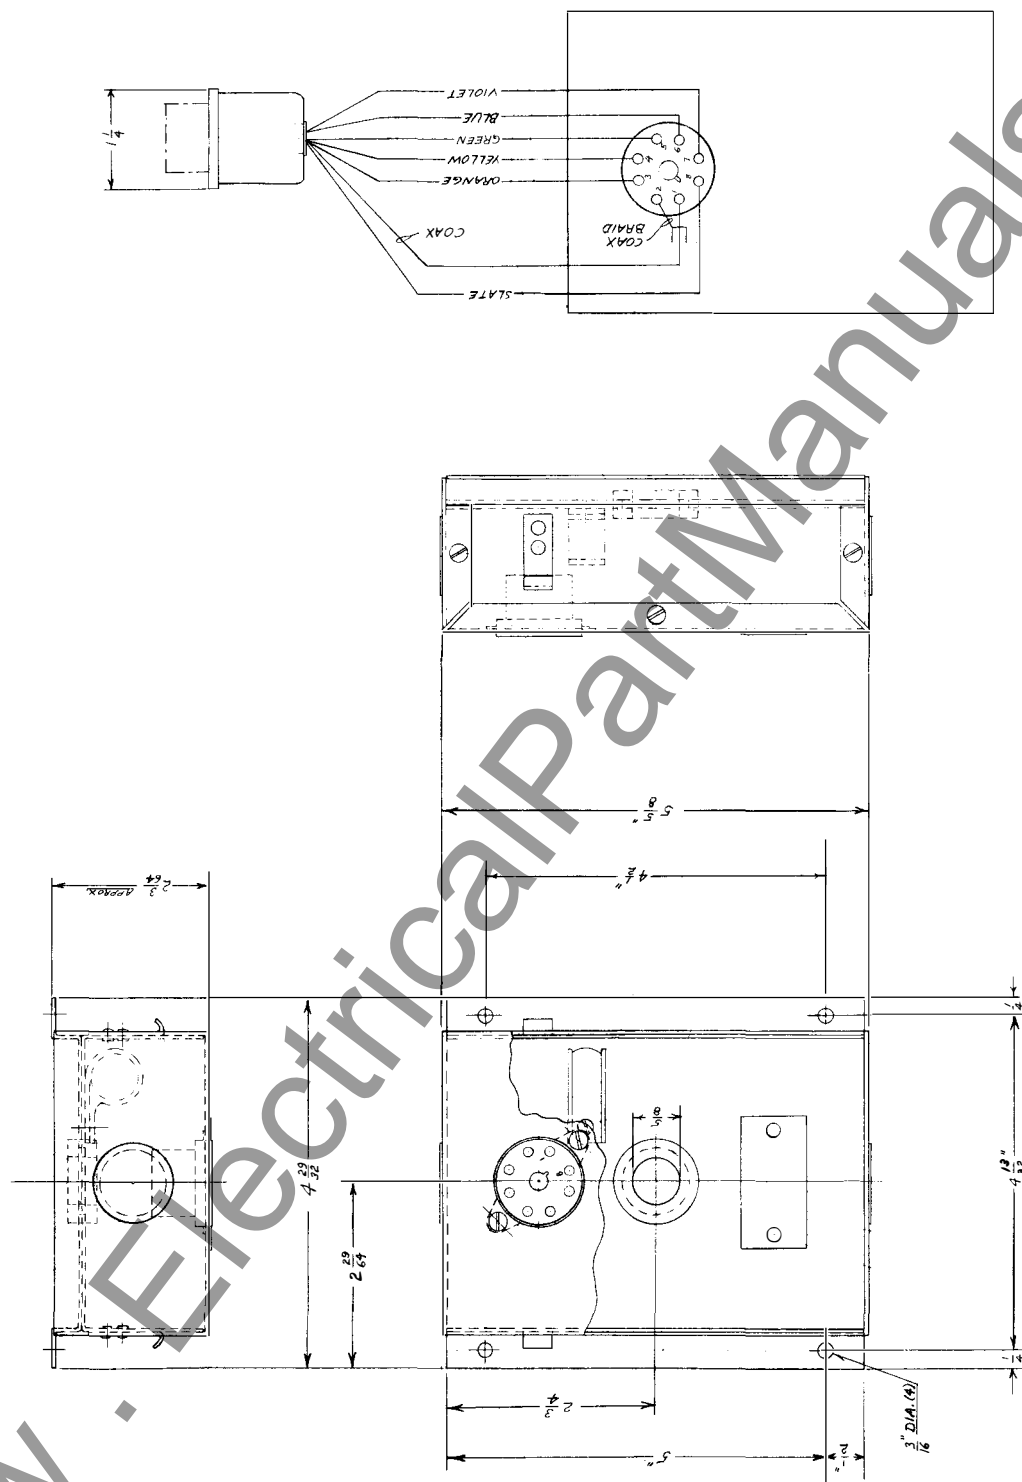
Voice Adapter Extension – Mounting Assembly (Dwg. 757D650 – Sub. 3)
